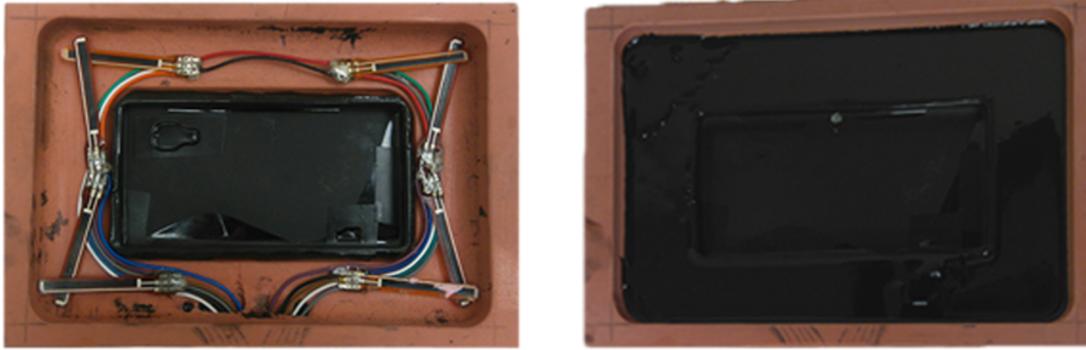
Making the flexible prototype with the circuitry before pouring the silicone solution and after.
